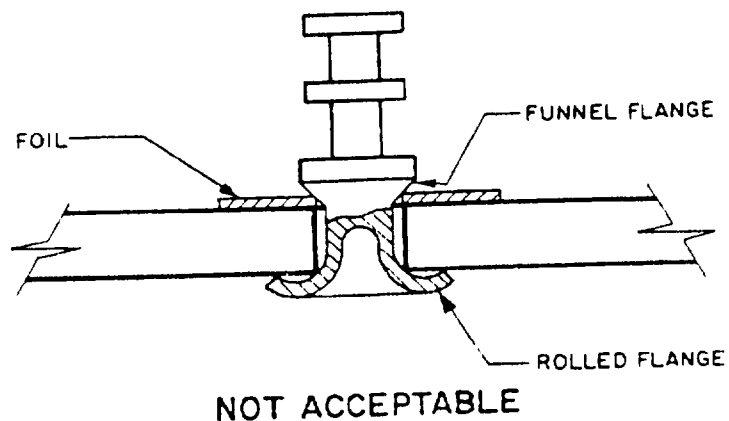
Funnel and rolled flange terminal (see 5.3.19.13.7).
